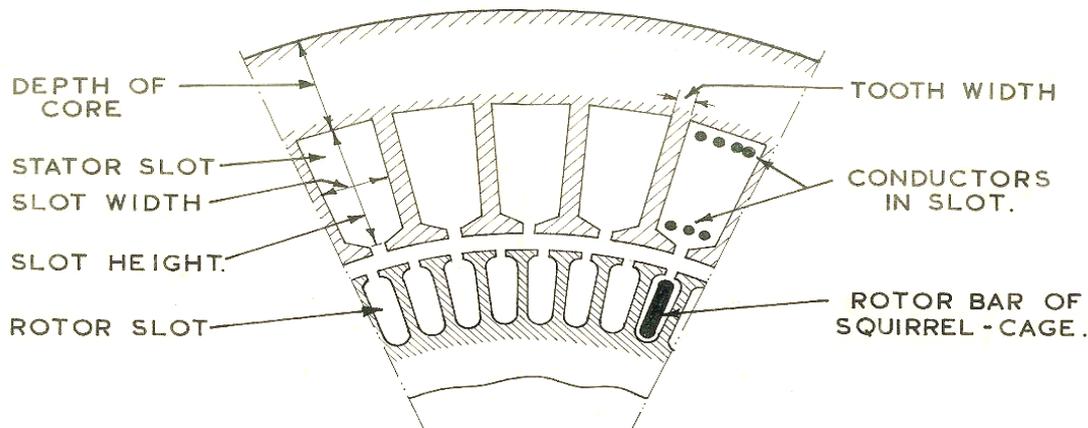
Sketch showing a portion of the motor stampings, both Stator and Rotor.
